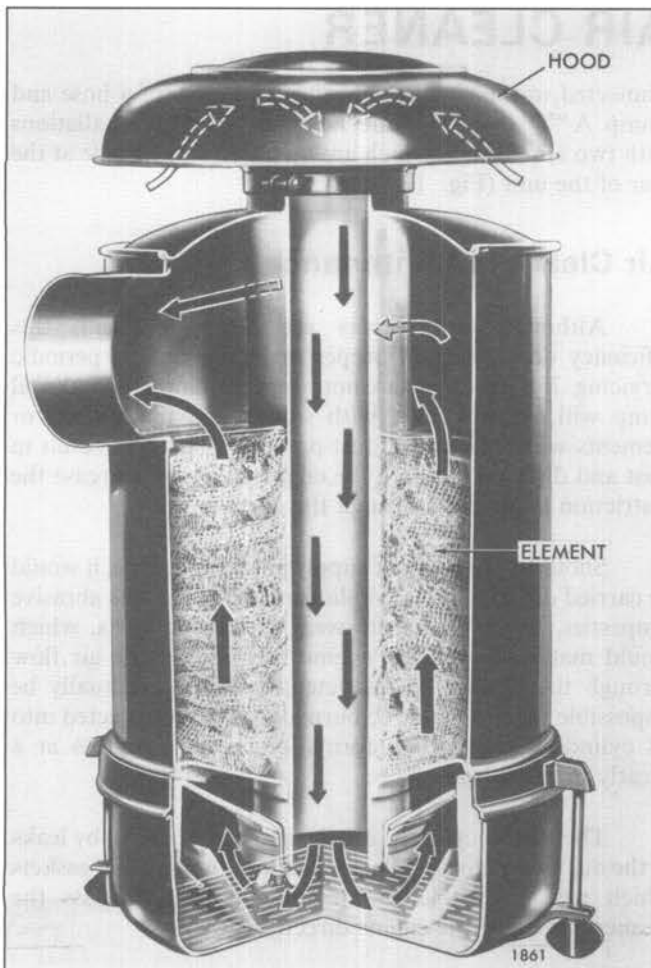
Typical Oil Bath Air Cleaner (Industrial Engines)
